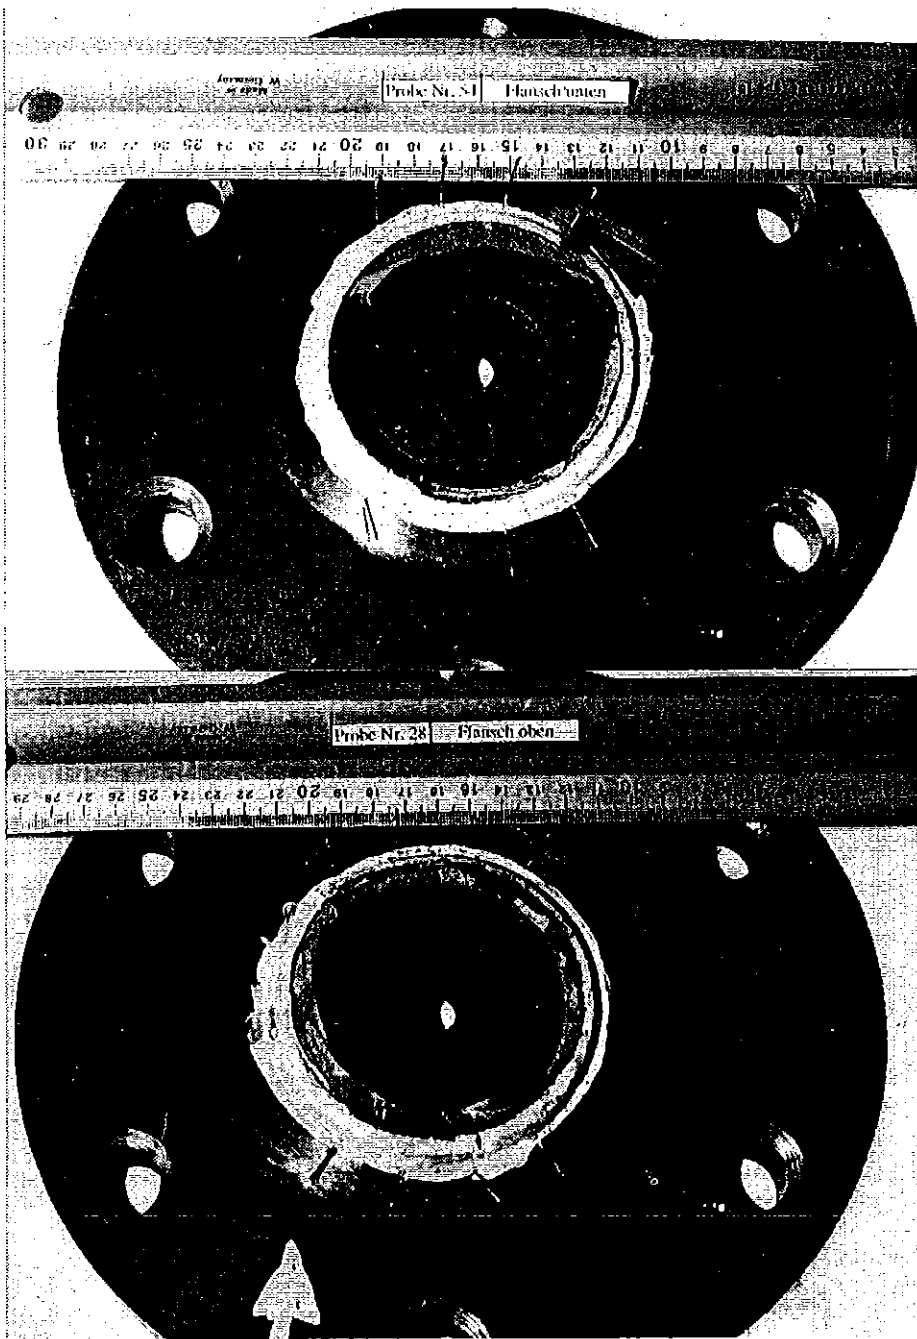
top: flange bend/tors 90° phase, high load bottom: flange bend/tors 90° phase, low load
